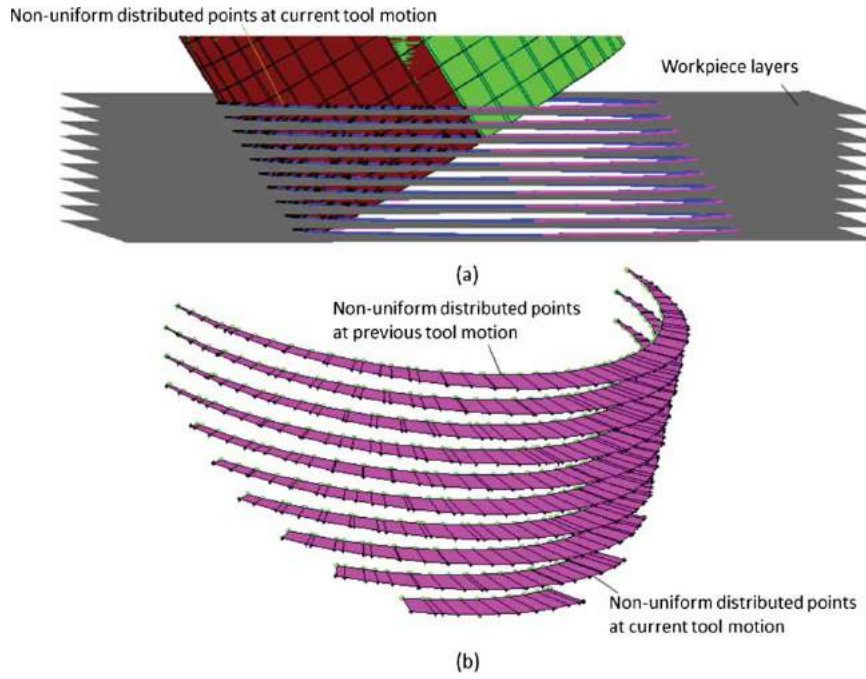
shows the simulation of the tool is removing material from the workpiece. It can be seen that the density of the removed workpiece is different which is due to the depth of cut changing for the whole toolpath.
